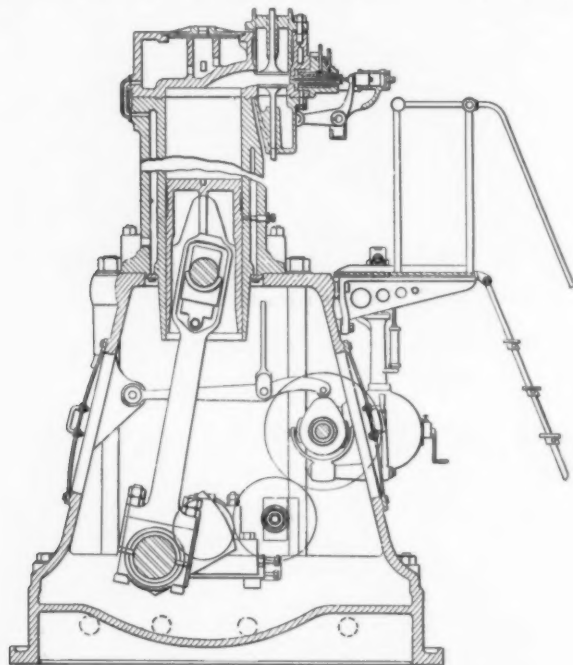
SECTIONAL DRAWING OF THE AMERICAN DIESEL ENGINE
